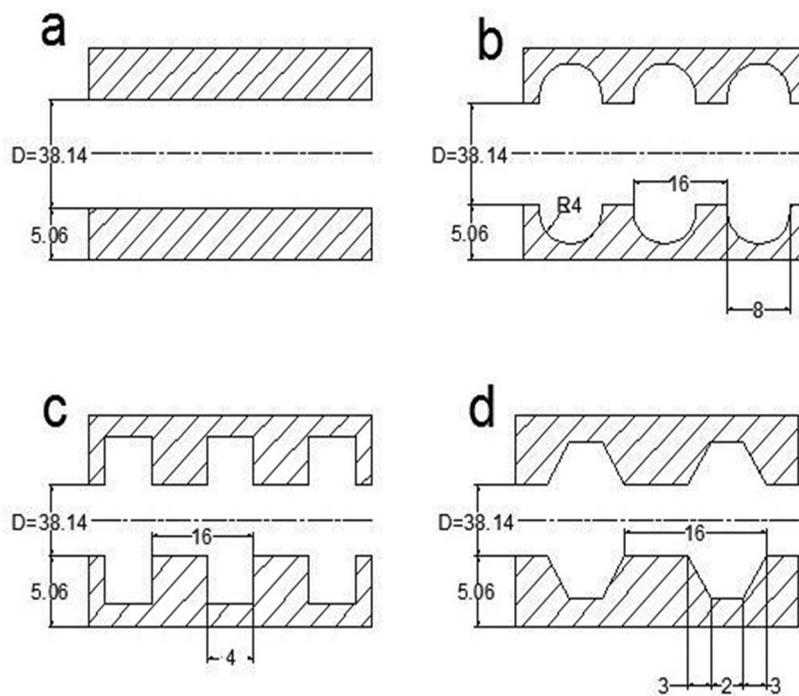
The geometric shapes of the grooved tubes in mm (a) plain tube (b) circular grooved tube (c) Square grooved tube and (d) trapezoidal grooved tube
